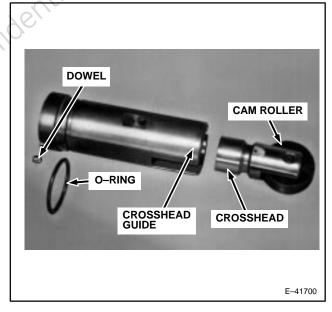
Valve Crosshead and Guide Assembly (Typical).
